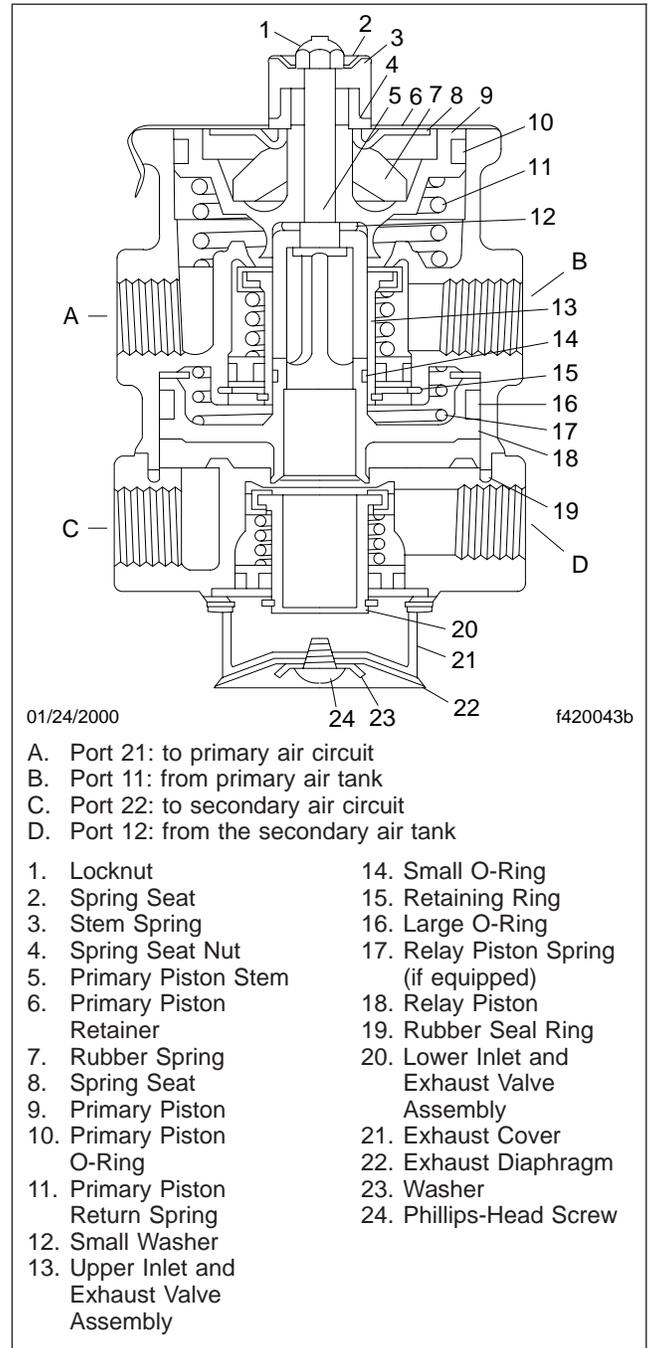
, Bendix E-6 Dual Circuit Foot Valve (sectional view)
